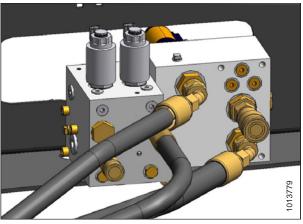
M150/M155/M155*E4* without Reverser Valve
